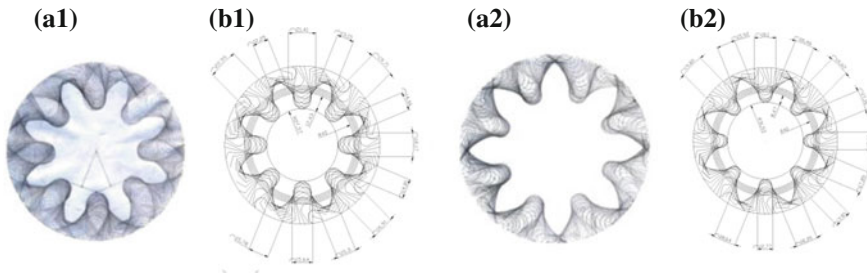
a Experimental and b AutoCAD simulations of the gears manufacturing process. *Examples gear with 10 mm module, 8 teeth, and profile movements: (1) 0; (2) 4 mm [8]
